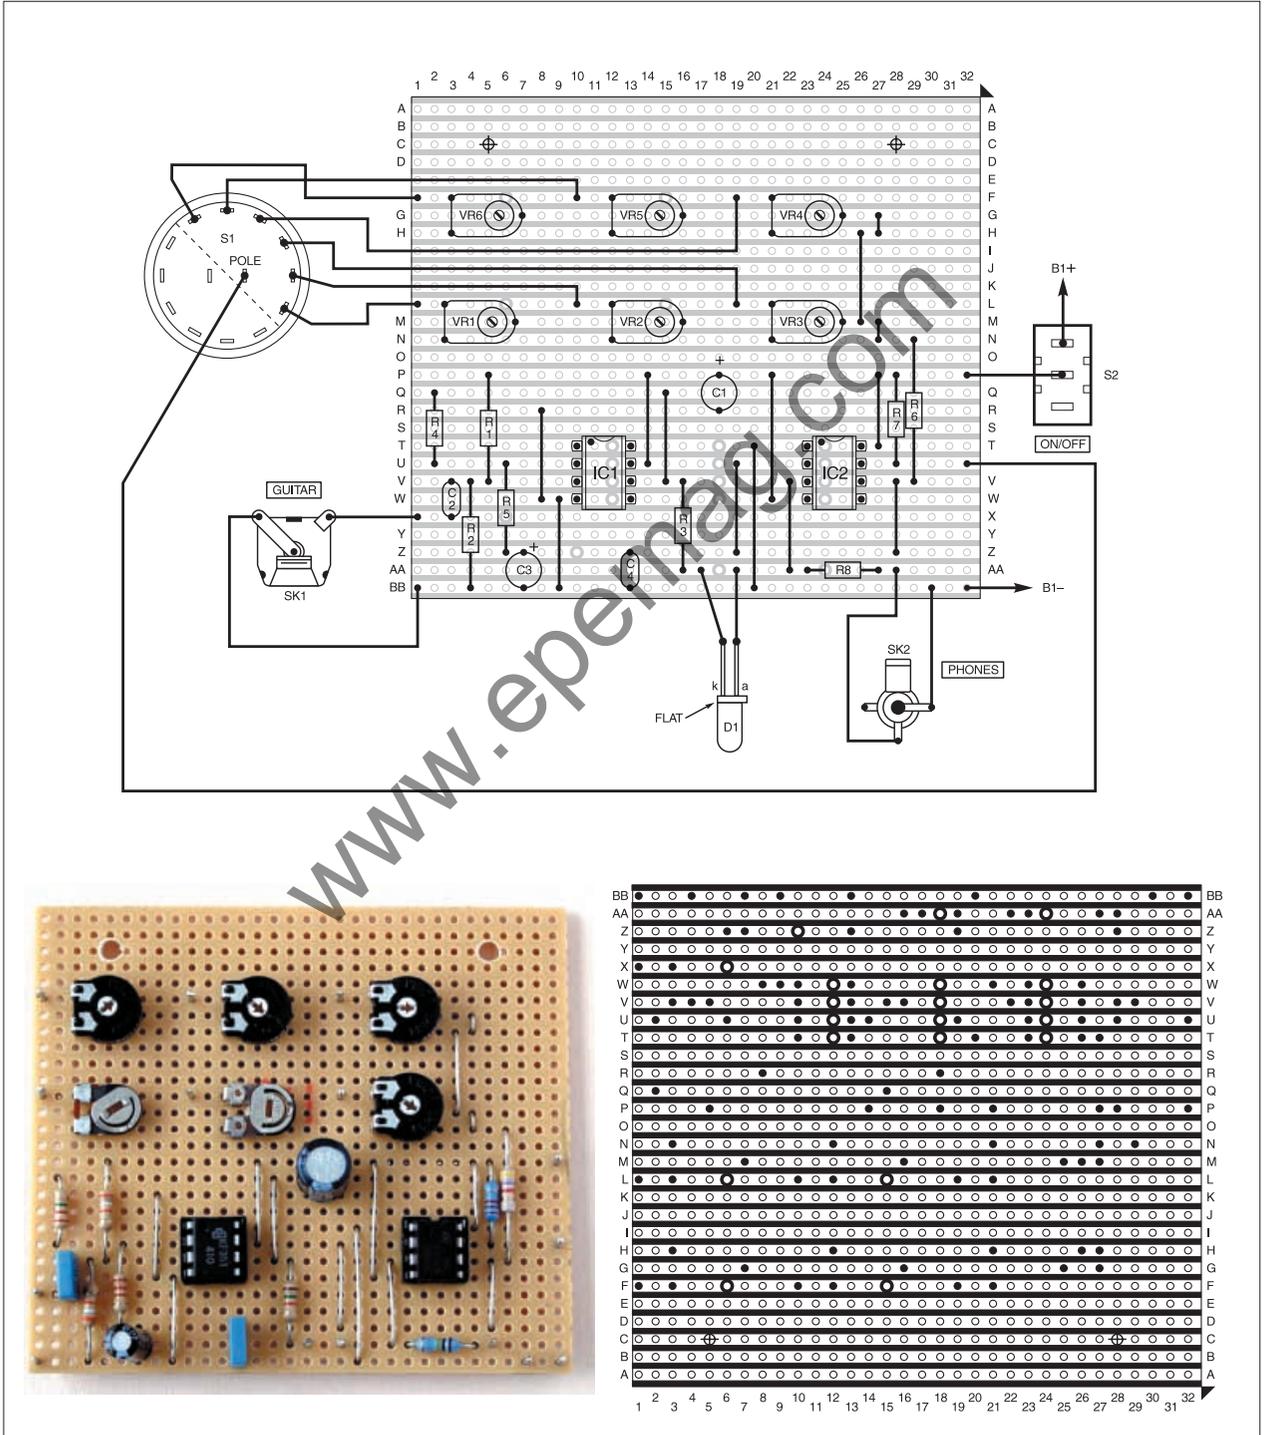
Electric Guitar Tuner stripboard topside component layout, interwiring to off-board components and details of breaks required in the underside copper tracks. The complete circuit board is shown above left.
